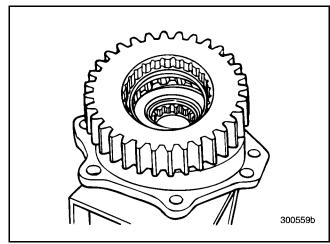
Main Drive Pinion Gear Removed from Shaft
